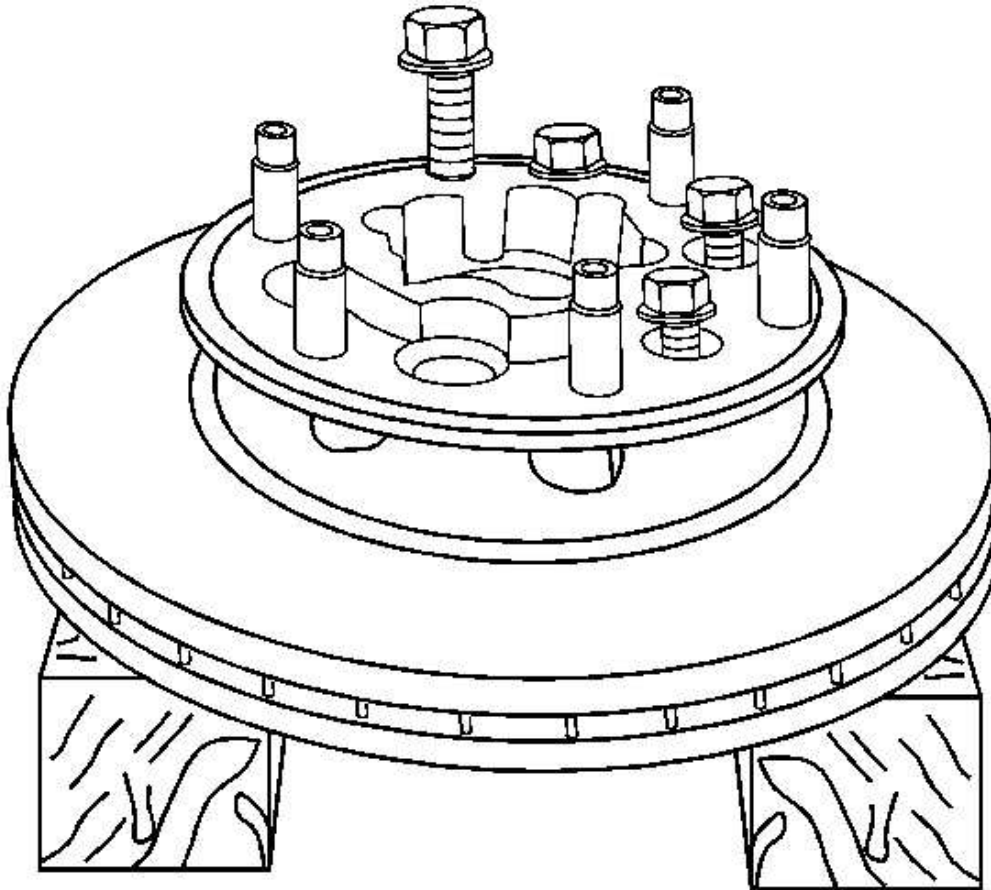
View Of Wheel Hub/Speed Sensor To Brake Rotor Bolts
